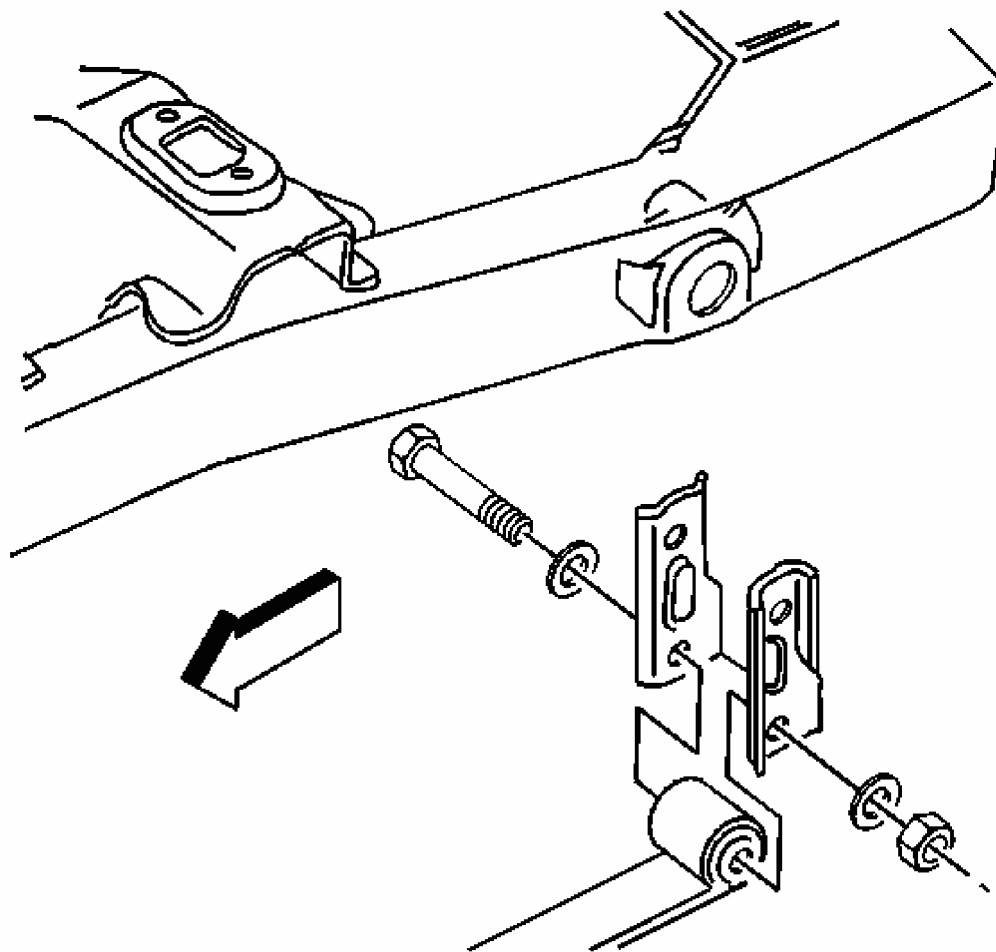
View Of Spring Shackle To Leaf Spring Mounting Nut & Bolt
